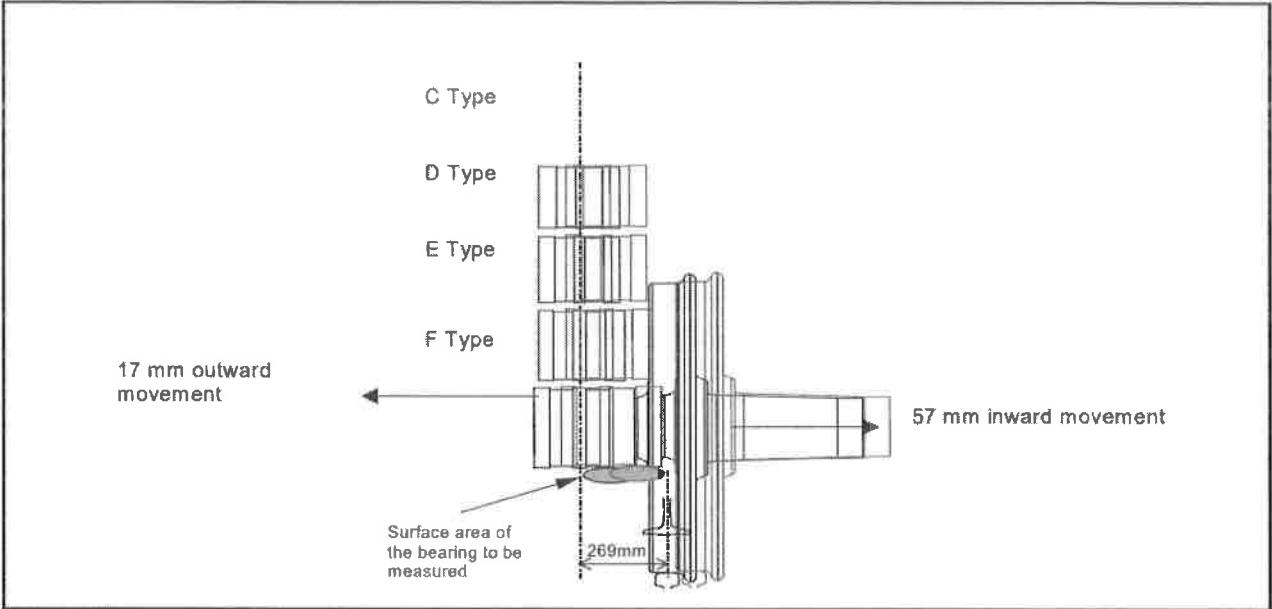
Measuring position on roller bearings, showing inward and outward lateral movement possible
